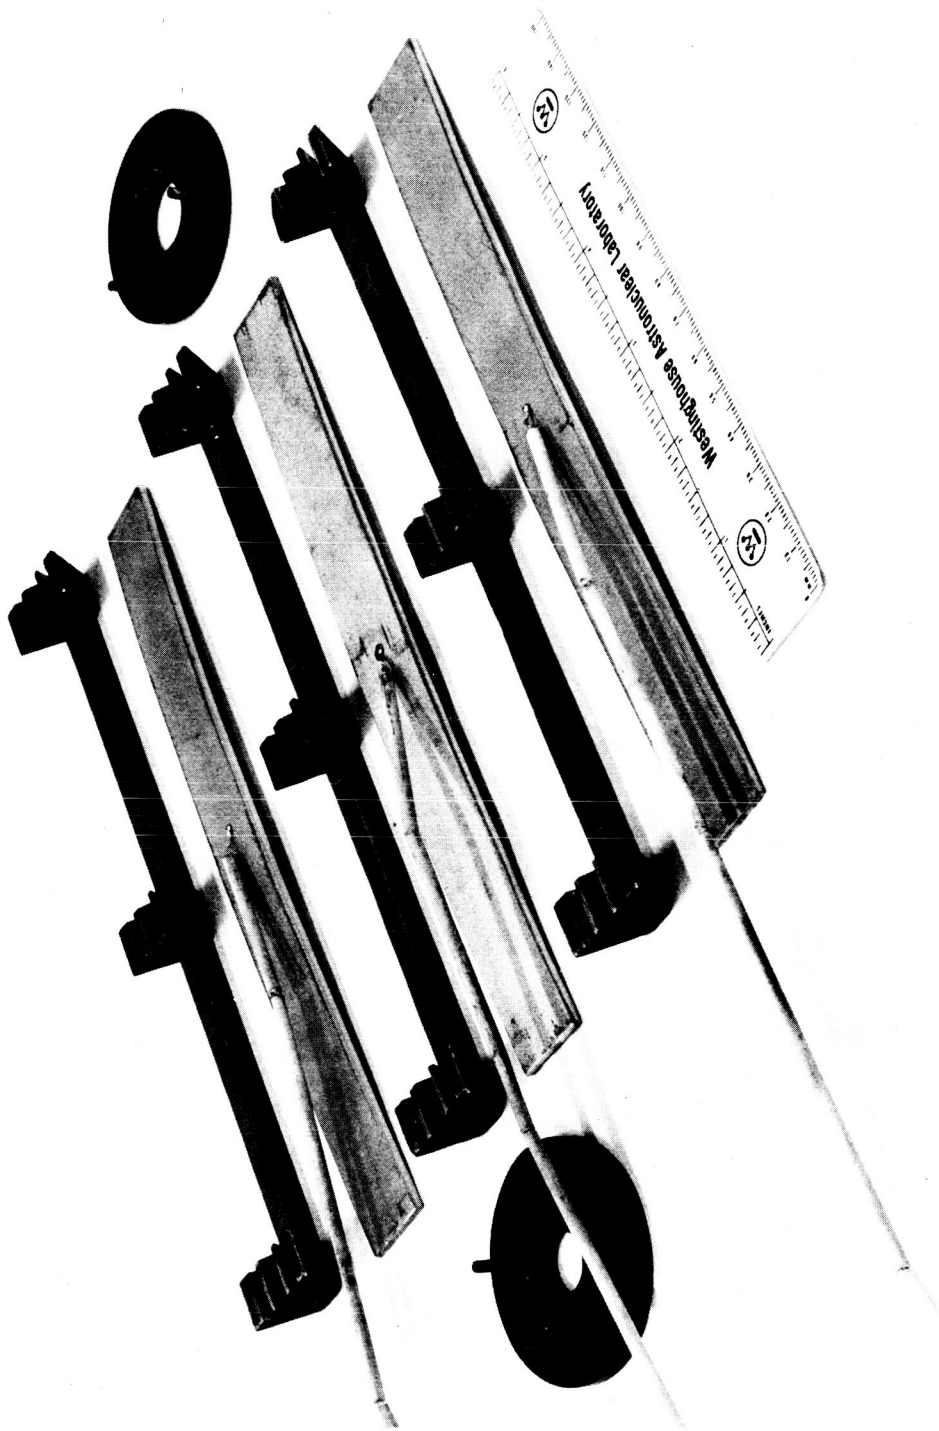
Thermal Cycle Specimens and Restraint Fixture Prior to Assembly
